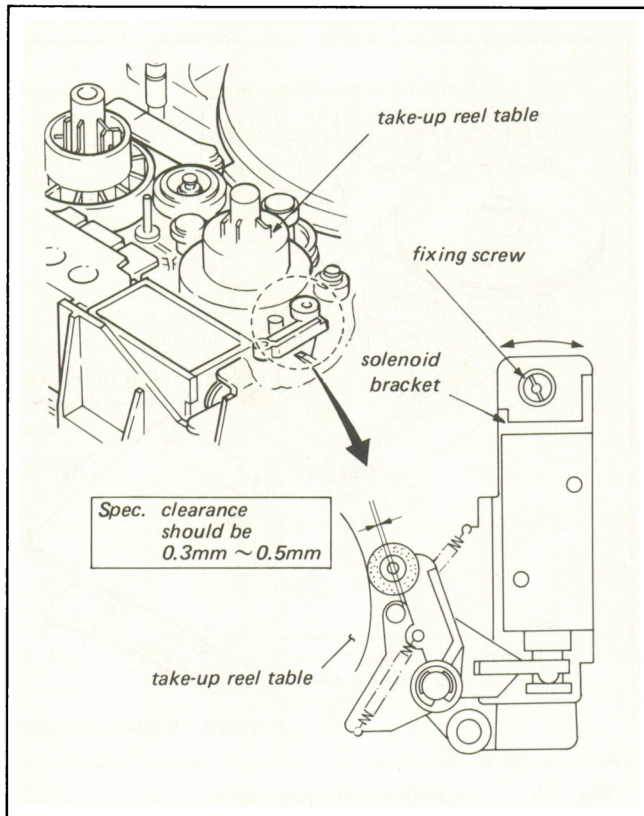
Take-up pause brake check (PAUSE mode with a cassette)
